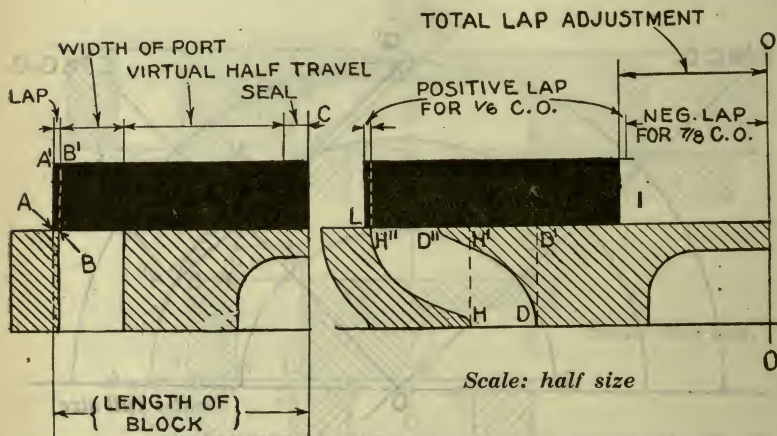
Method of finding width of block of Meyer cut off gear.
